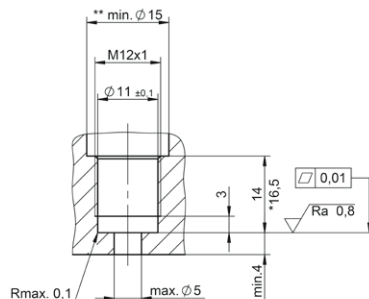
Mounting bore Type 6217AB02000 and 6217AC02000
